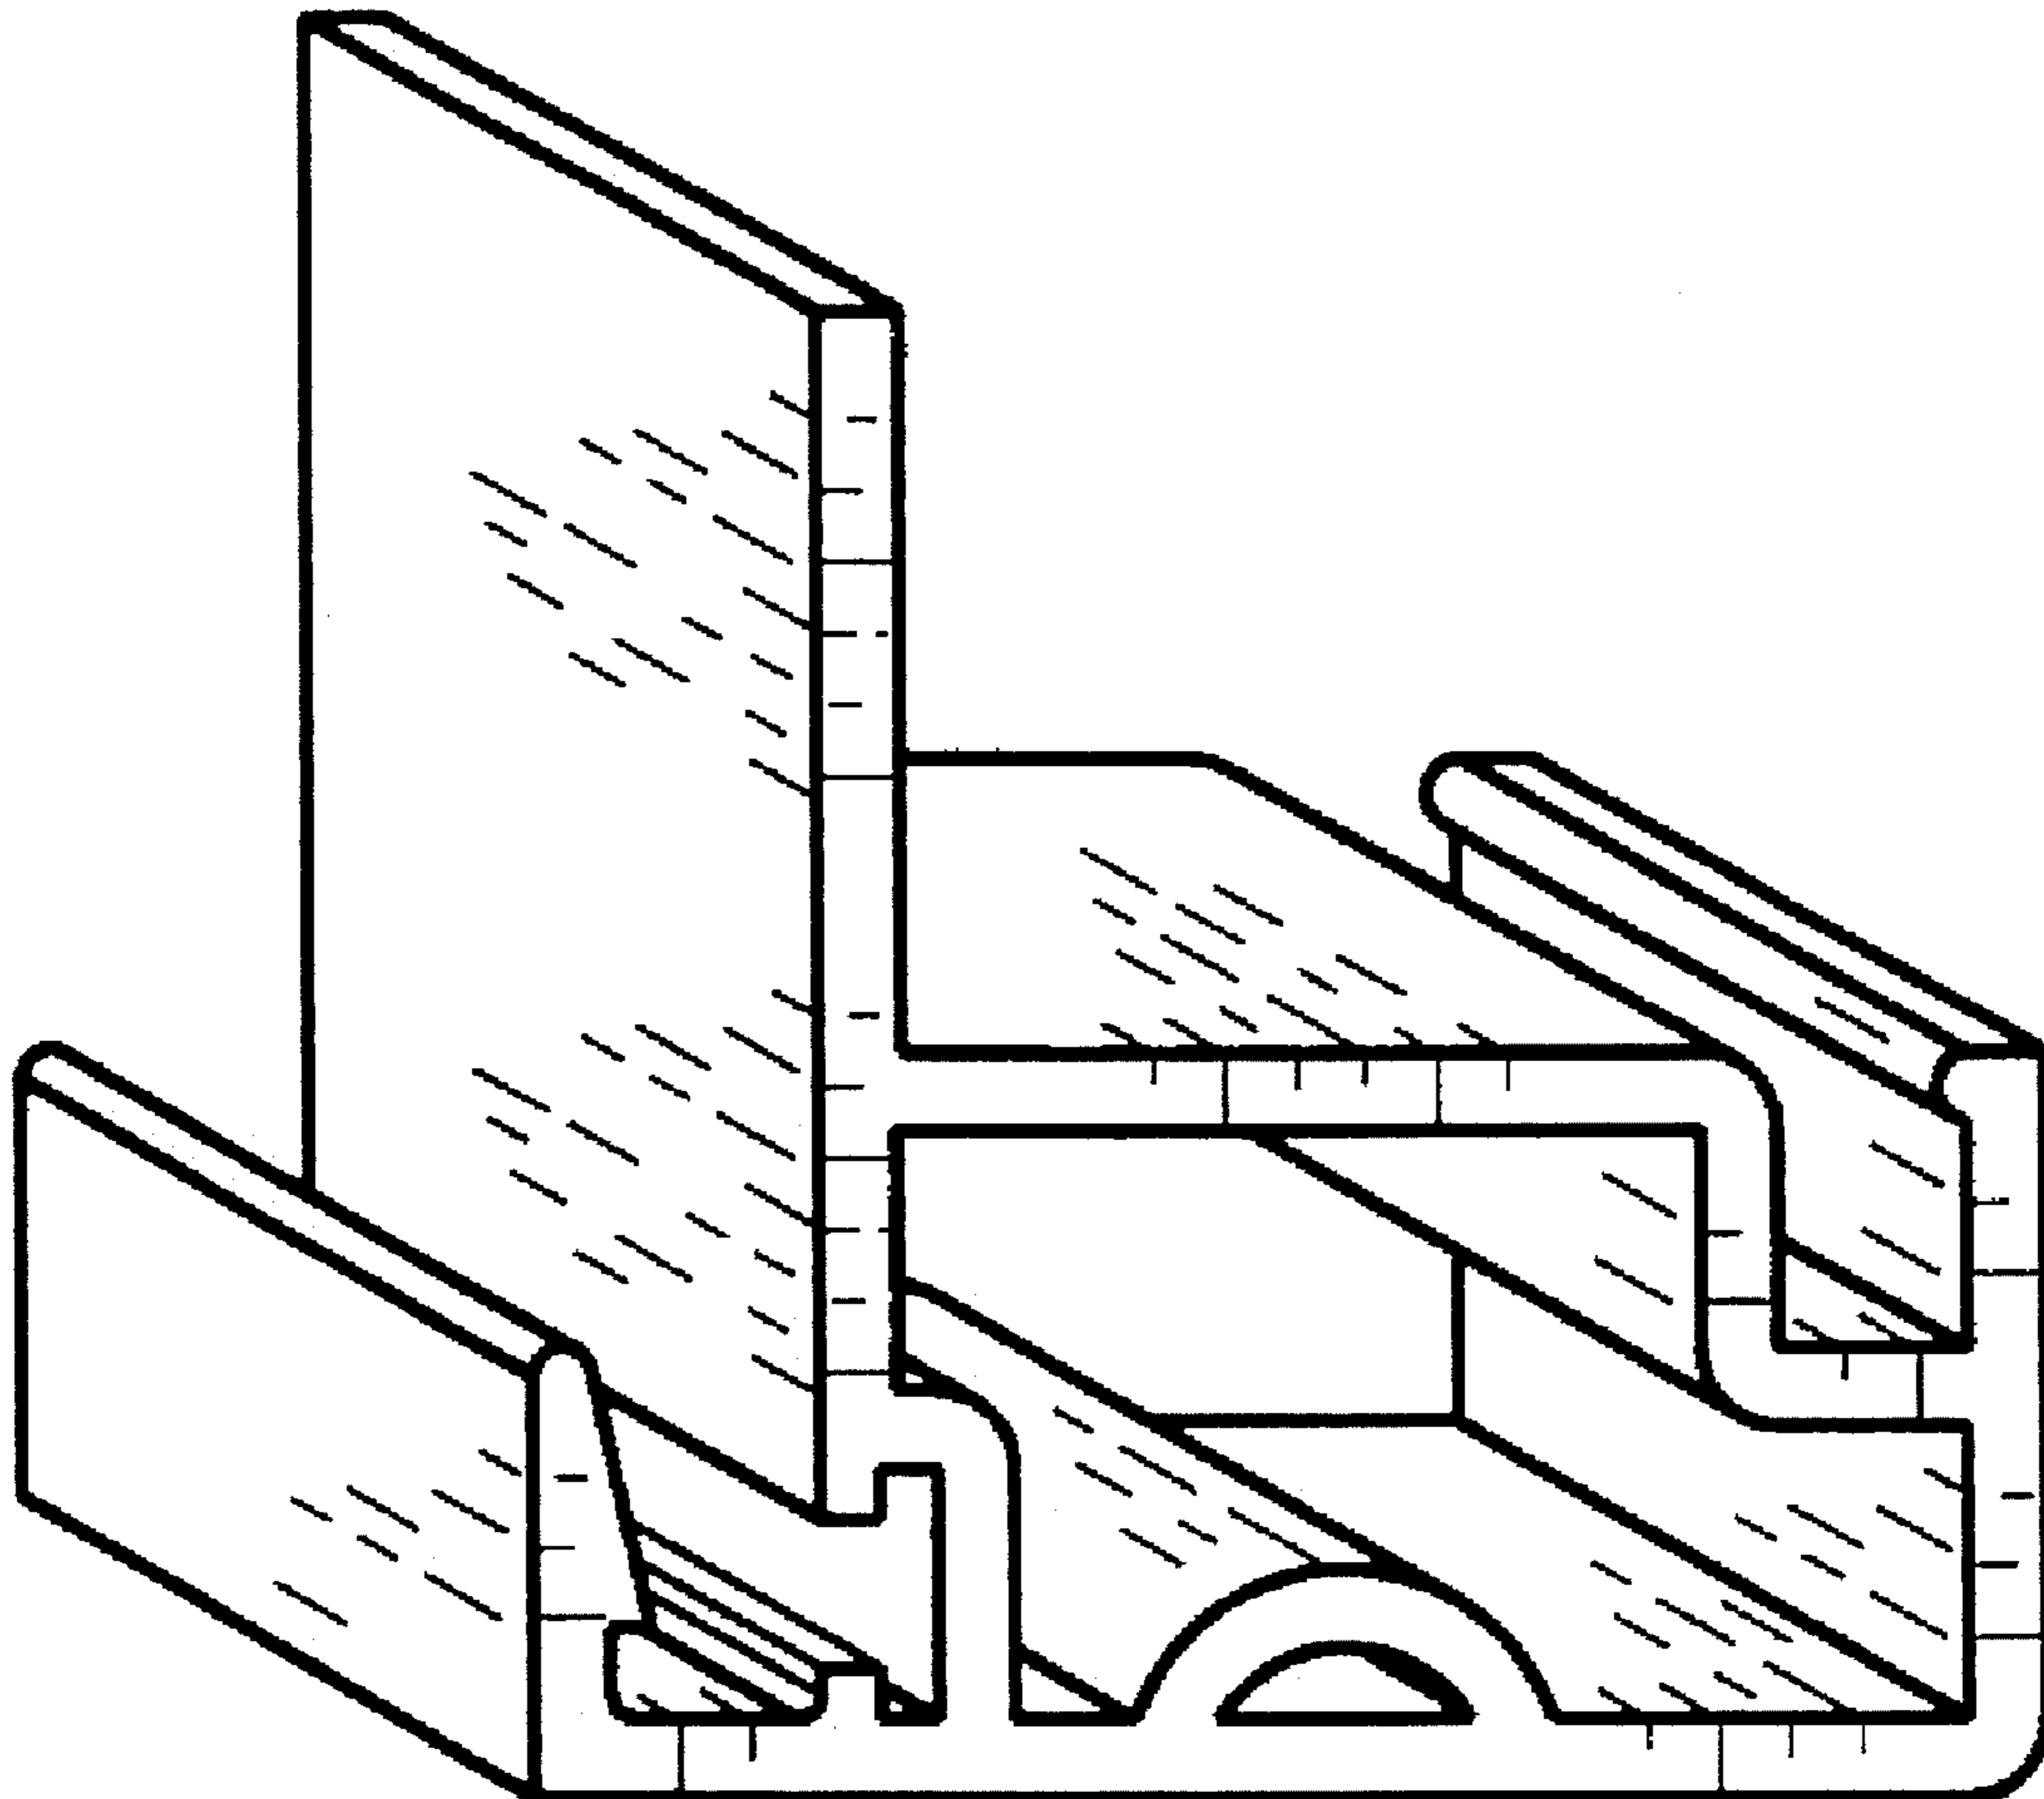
is a top right perspective view of a window component extrusion showing my new design, the window component extrusion being of indefinite length; and, FIG. 2 is a bottom left perspective view thereof.
